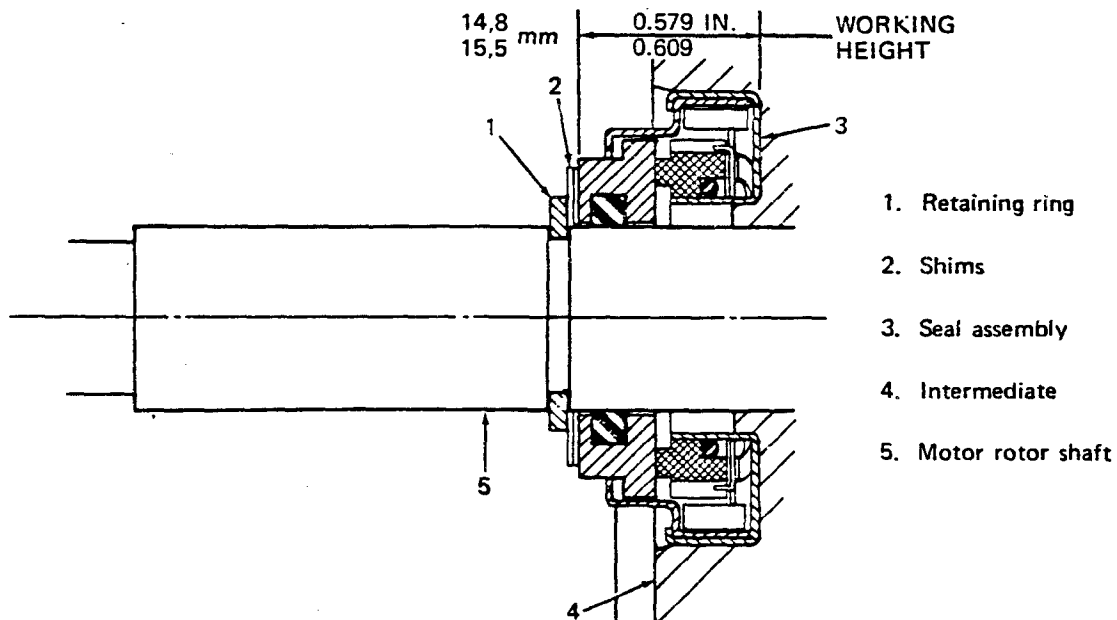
Cross Sectional View of Typical Inner Shaft Seal
